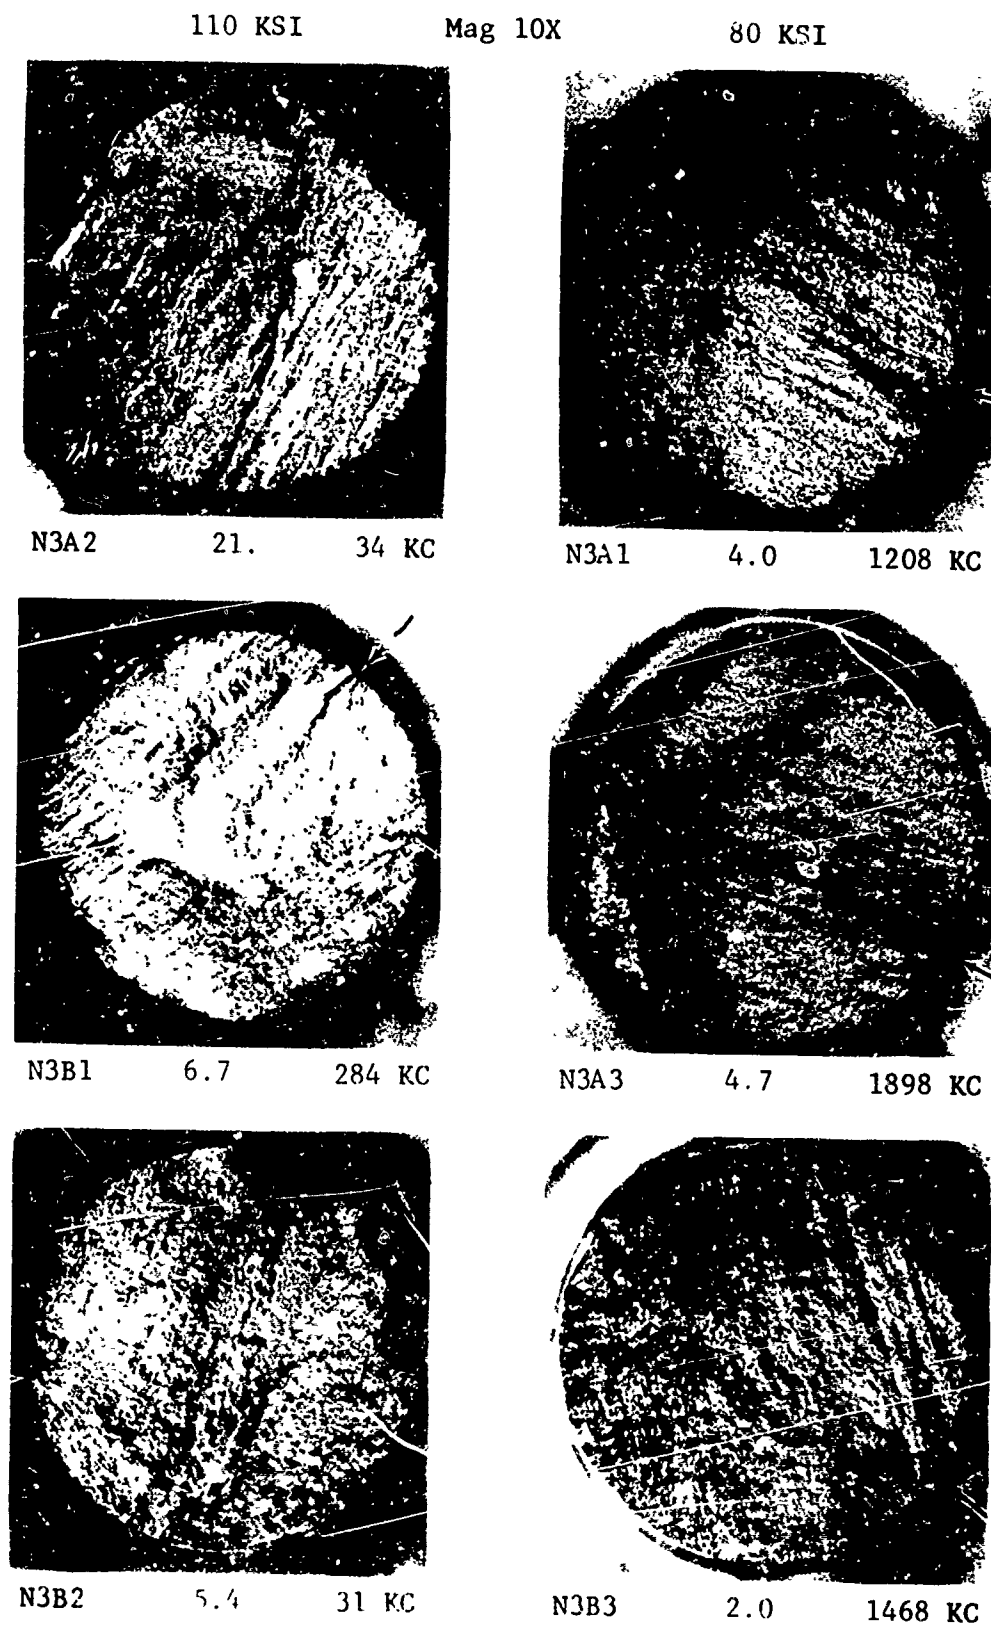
Fracture Surfaces of Failed Fatigue Specimens Series N3-
